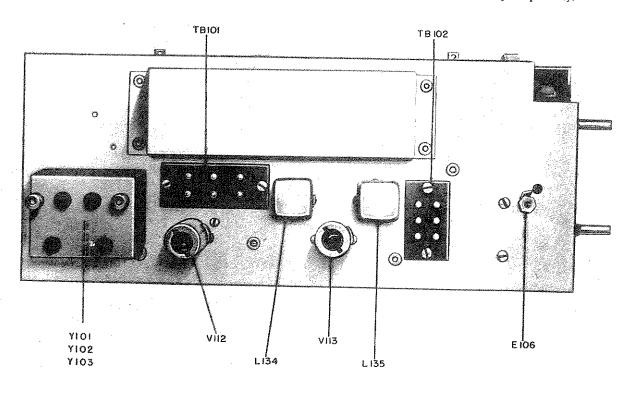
Radio Receiver R-395/PRD-1, if. and af chassis, bottom view (lower-half components).
